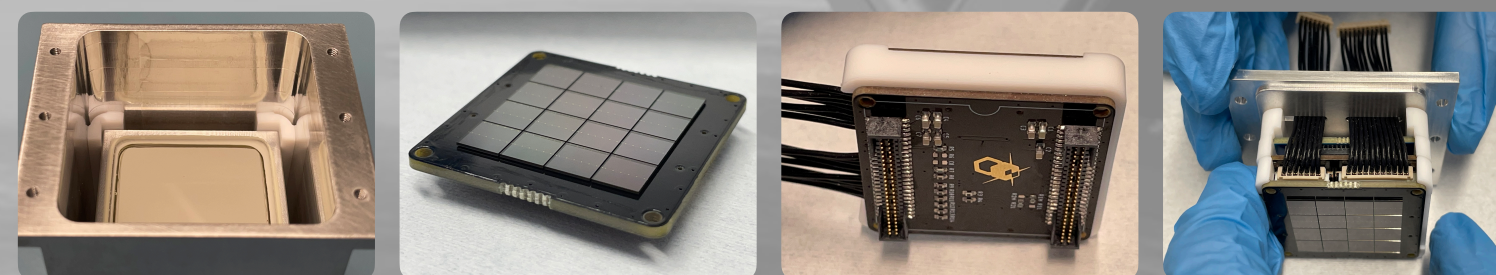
Various GMOD flight model components during integration. (L-R): CeBr₃ scintillator in housing, SiPM array, Interface PCB, detector assembly electronics with spacers and aluminium end-cap.
